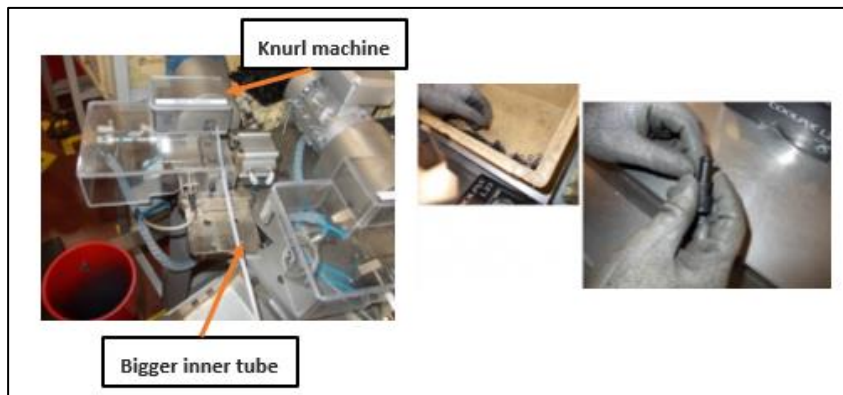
Knurl inner tubes operation (left) and assembling of O’ring on the conduit end fitting (right)
